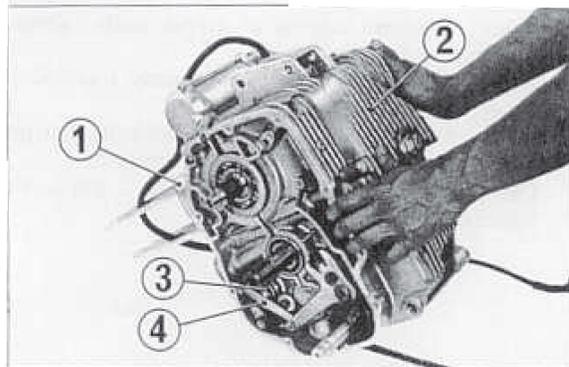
(1) Upper crankcase (3) Gearshift drum
